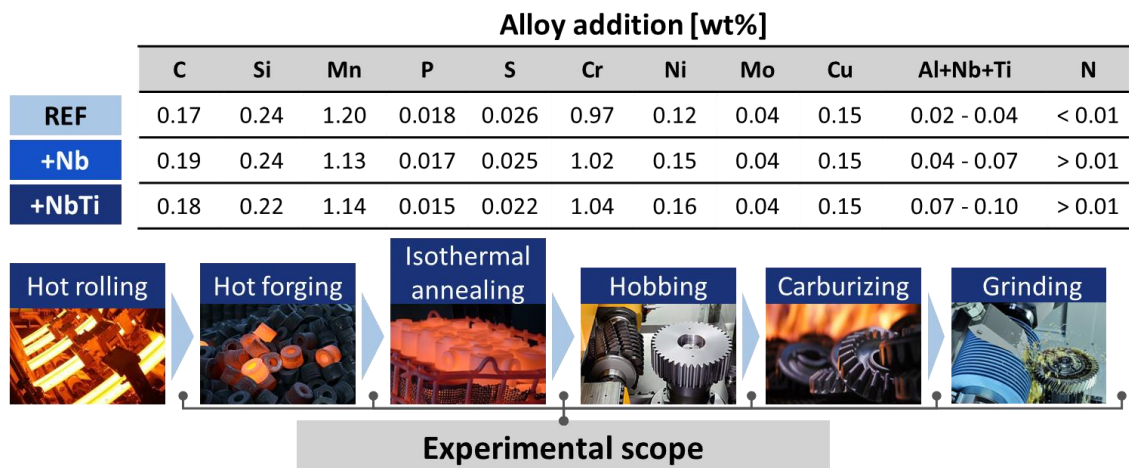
Chemical composition of specimens and gear manufacturing chain investigated.
